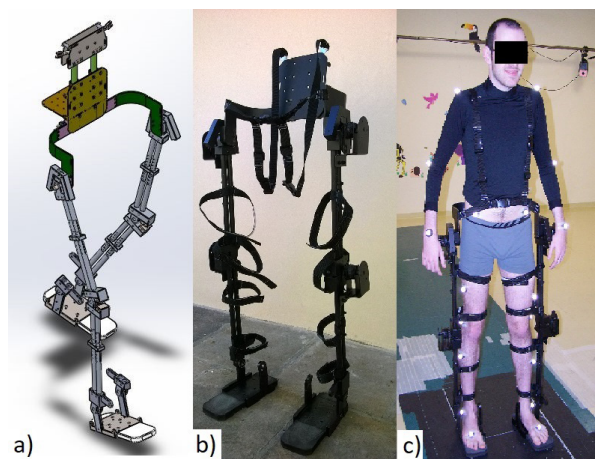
Assembled ELL: (a) as designed by CAD, (b) as assembled and, (c) testing by a healthy person.
